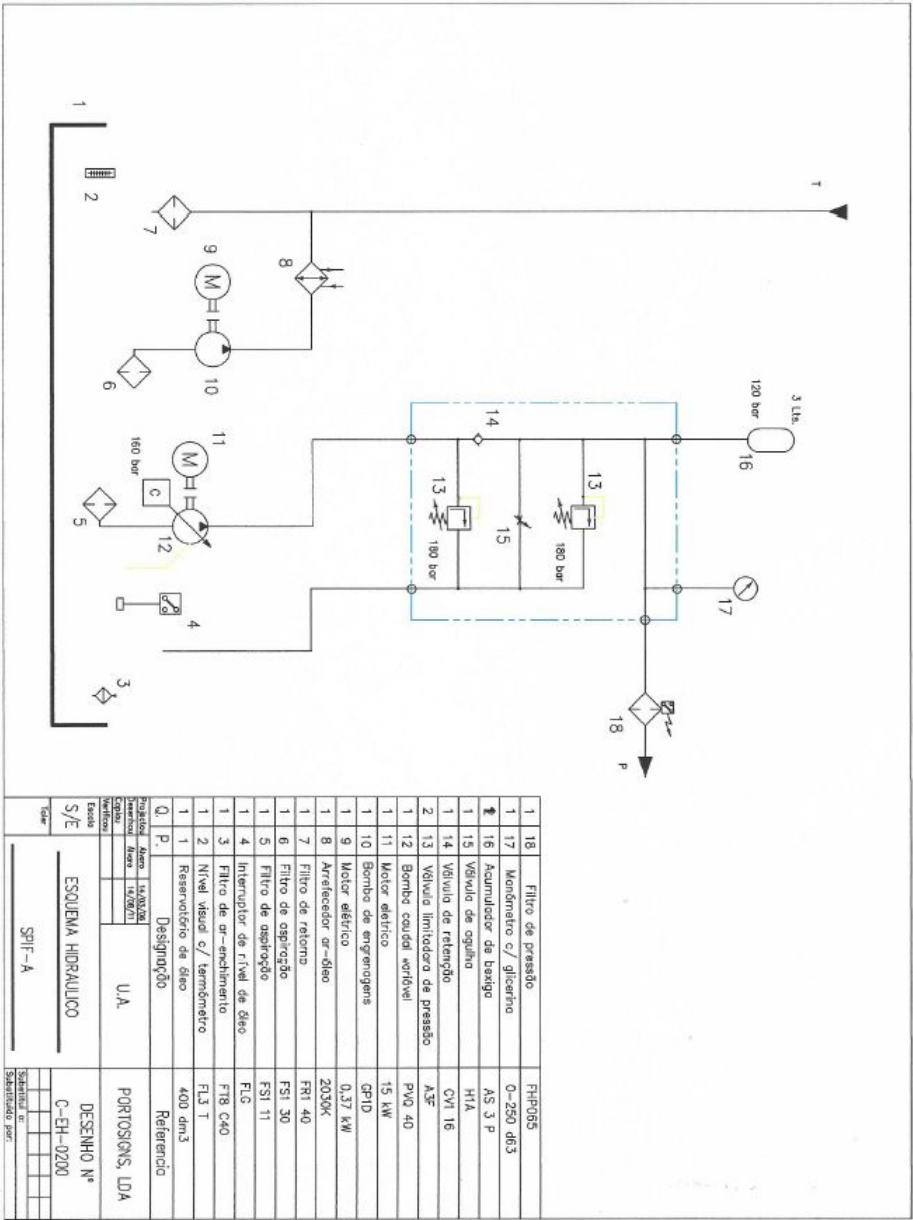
Hydraulic plan regarding the new hydraulic plant.
